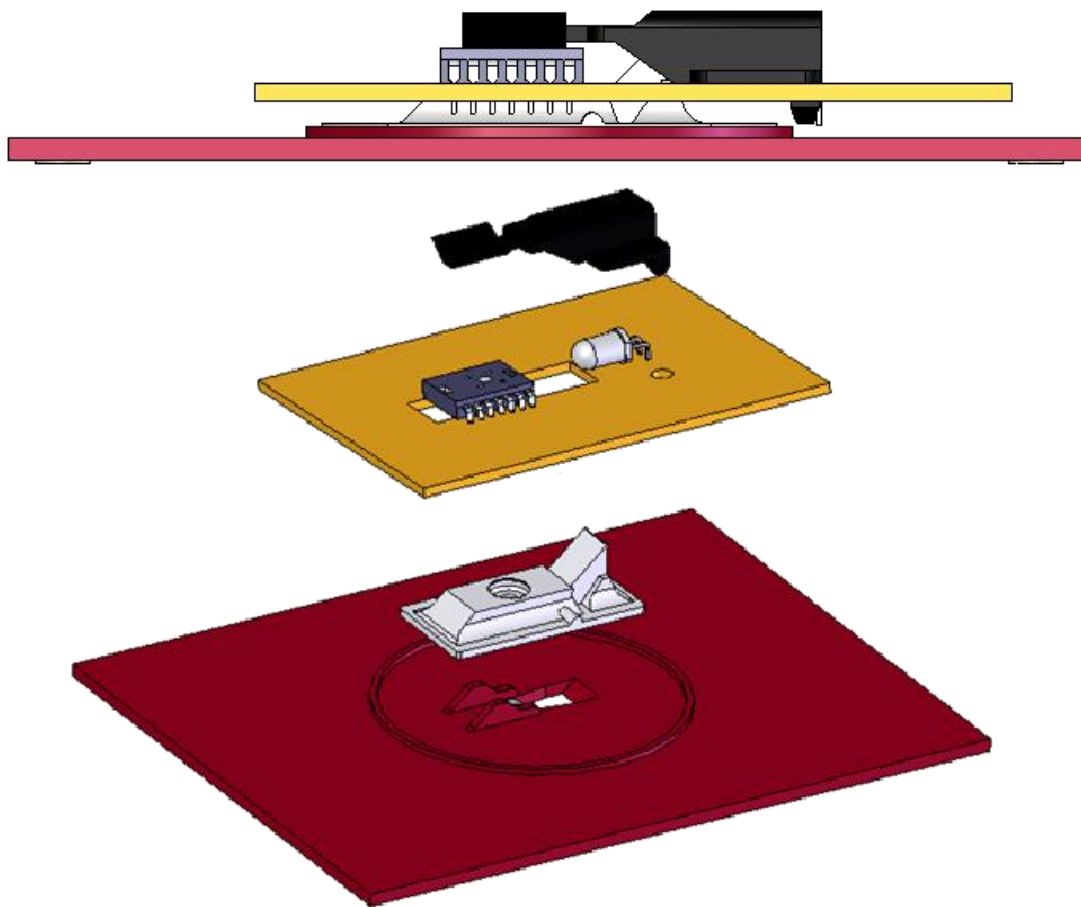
3D Assembly for Mounting Instructions of PAW3702 Mouse System
